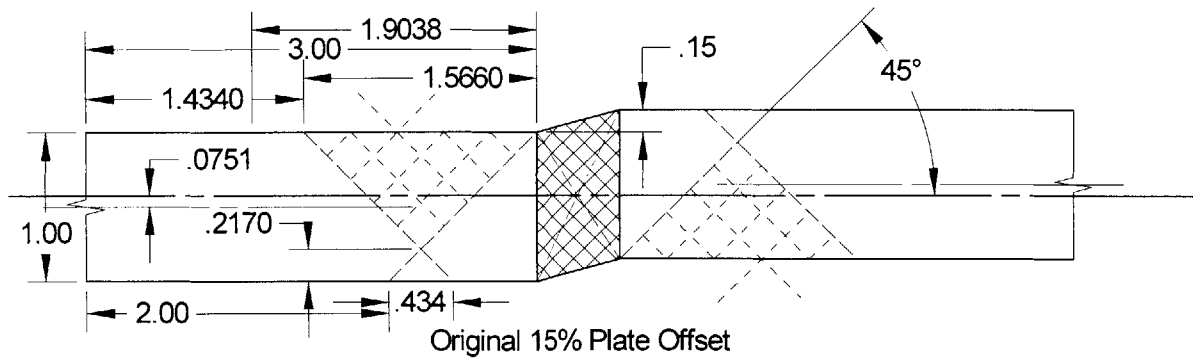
Initial weldment geometry (dimensions in cm).
